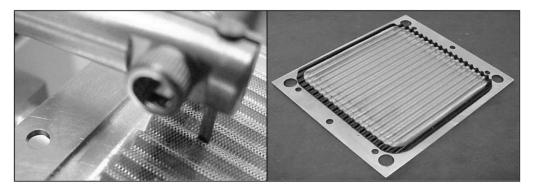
Detail of the spot welding technique used to attach the expanded mesh screen current collectors to the separator plates (left), and the finished half cell for a WTC2 half-cell (right).
